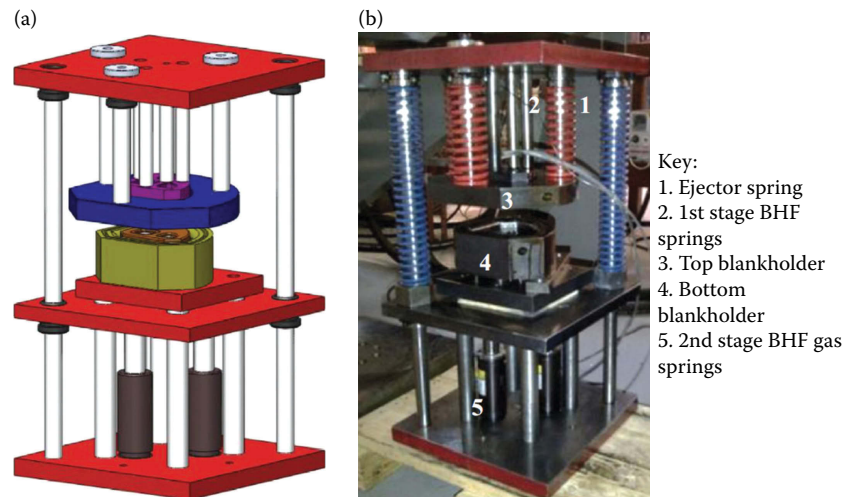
(a) Geometric model and (b) photograph of the stamping tool used^[12]
